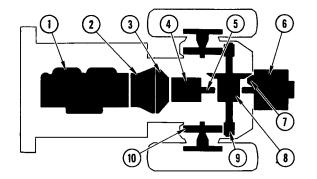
STEP GEAR TRANSMISSION DRIVE SYSTEM
